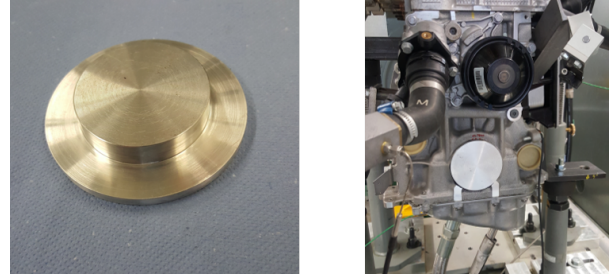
Sealing plug to prevent oil leakage on the FEAD side of the engine
